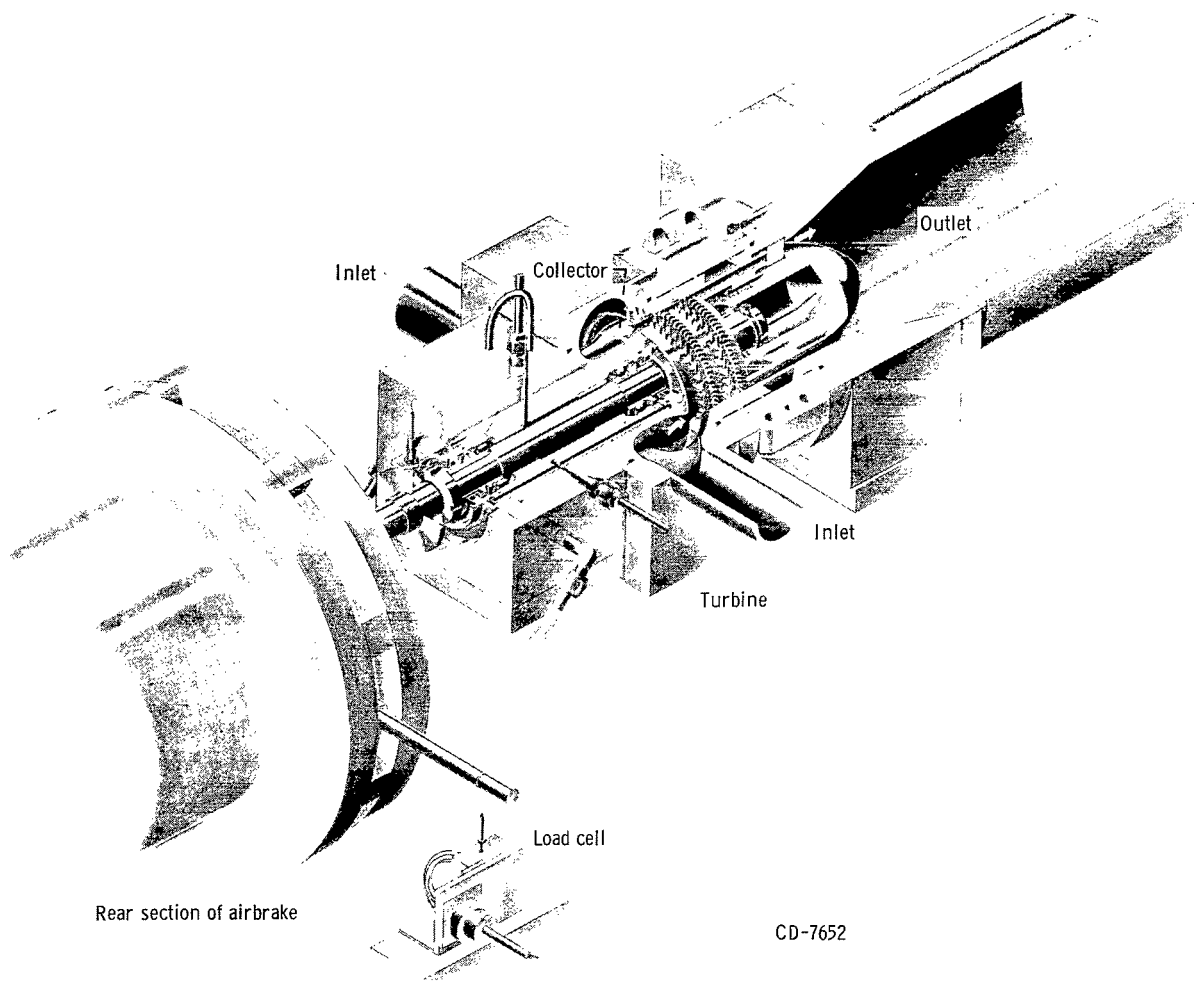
Cutaway view of turbine assembly with section of airbrake.
